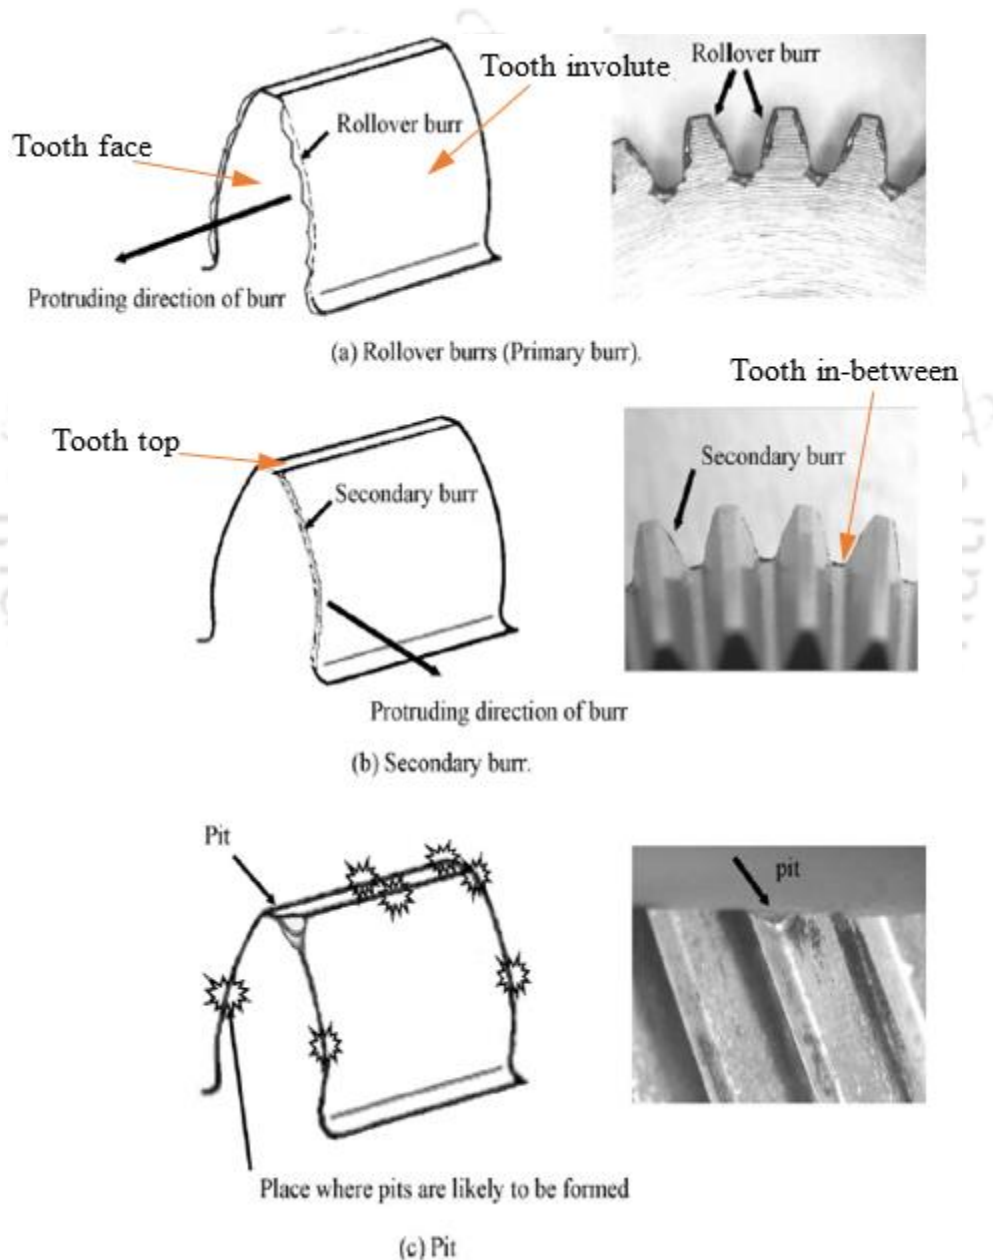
(a) Rollover burrs, (b) secondary burrs, and (c) pits formed on different surfaces of a small gear [77]
